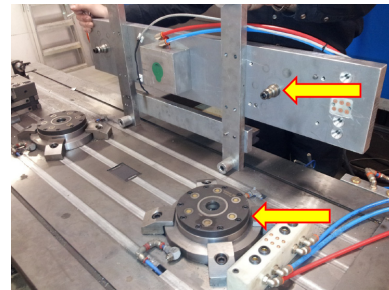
Passive RFID tag on the fixture and the reader on installed on the CNC milling machine bed.
